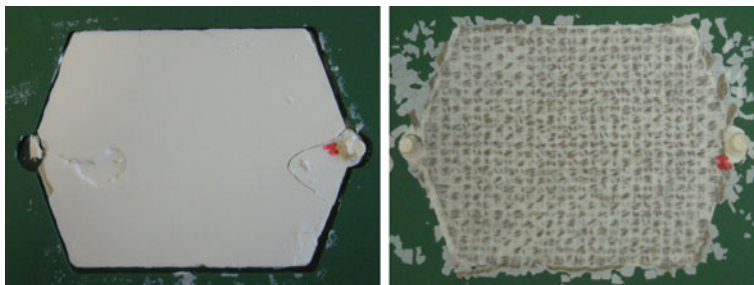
Pure pCBT (*left*) and flax fiber reinforced pCBT (*right*) plates produced by RTM
